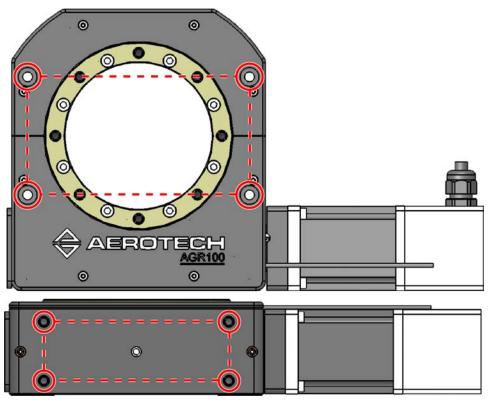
View of an AGR Stage Showing Mounting Holes
